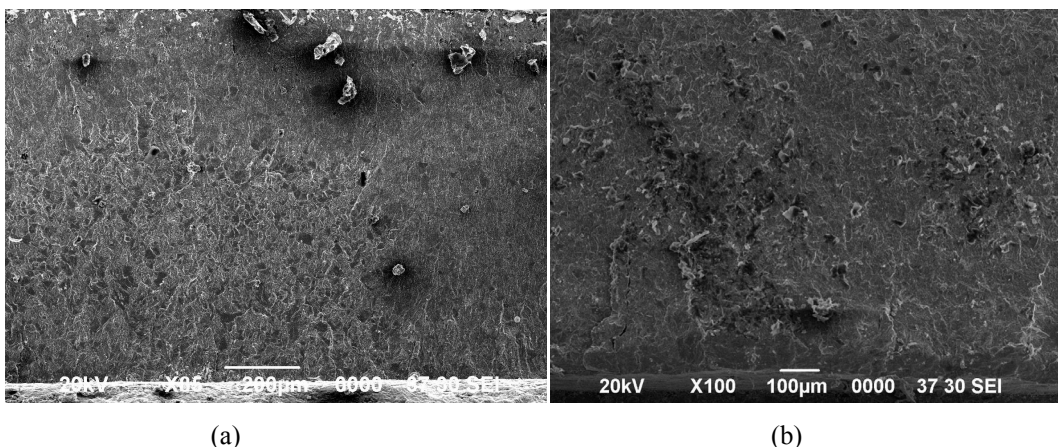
Initial crack of fatigue test samples: (a) 3.0-1.0 mm joint (b) 1.0-1.0 mm joint
